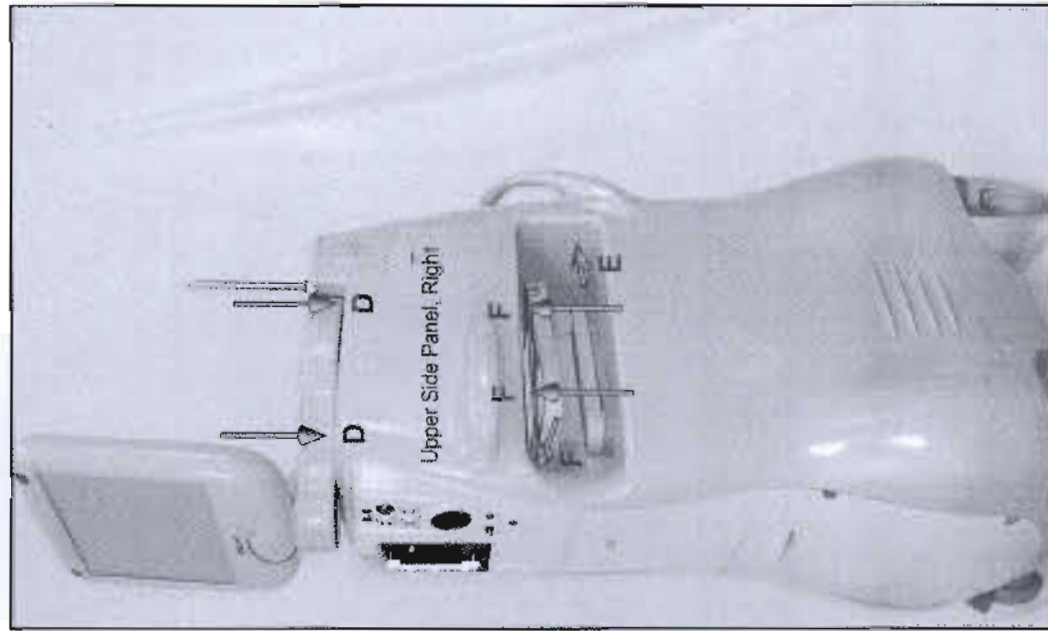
Fastener Locations for Upper Side Panel. This panel must be removed before the Lower Side Panel can be removed.
